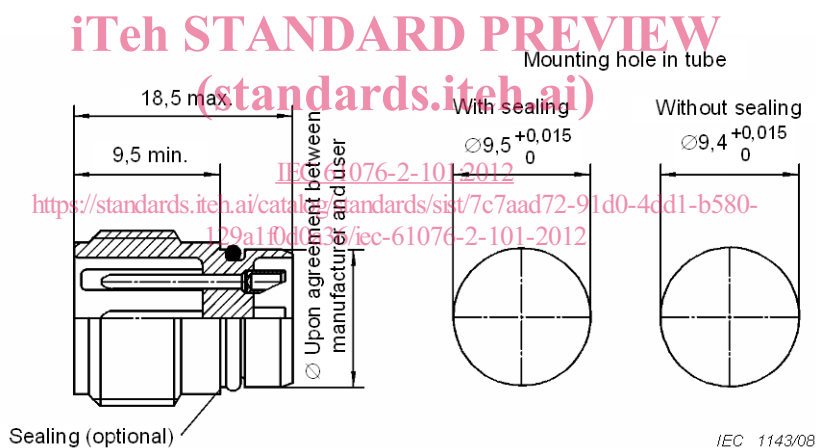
Tube insert, male contacts, mounting with thread M12 × 1
